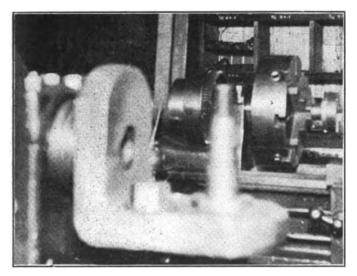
Bracket for Holding the Angle Cock on the Lathe Screw
